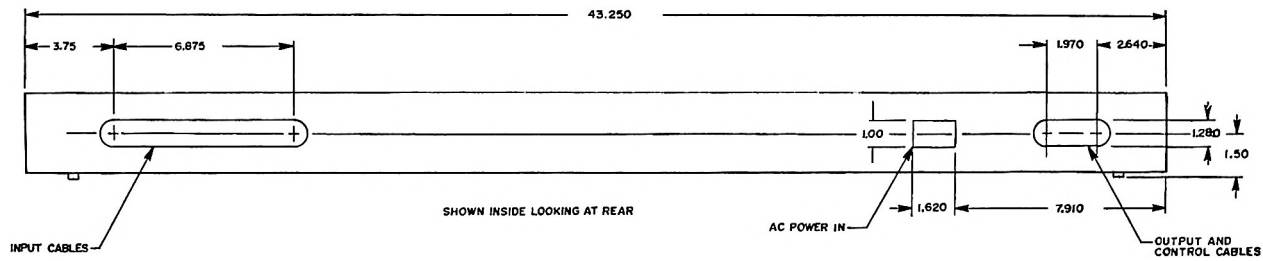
KC-10-LC-10 OUTLINE AND DIMENSION DRAWING
